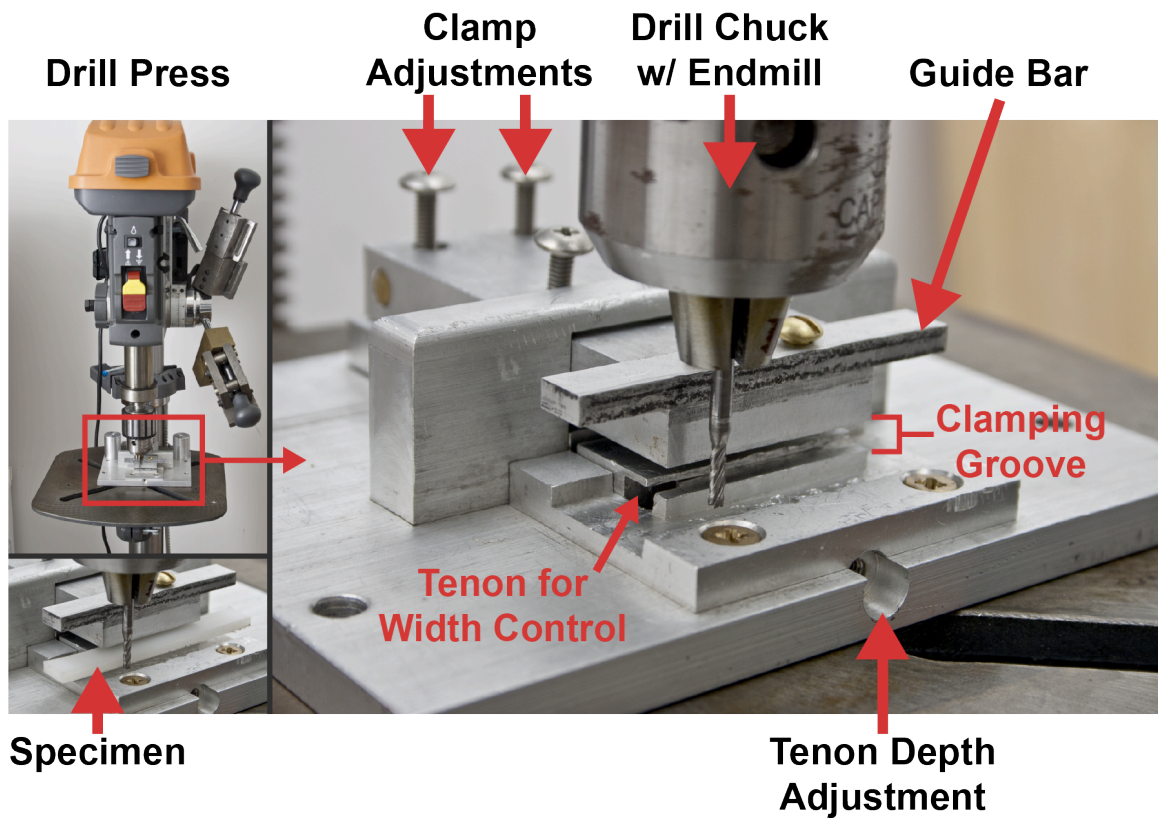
Drill press setup.* A free-standing drill press (top, left) was used with a custom router jig (right) for machining uniform cortical bone beams. The jig was equipped with a guide bar, which engages the smooth shank of the endmill bit above its flutes to create a straight pass. The jig also contained a clamping mechanism, capable of accommodating 1-8 mm-thick strips. A tenon with adjustable depth was situated in the clamping groove (labeled above, right) to control the ultimate strip width. The jig is shown loaded with a white plastic beam at bottom left, representative of a cortical bone strip.
